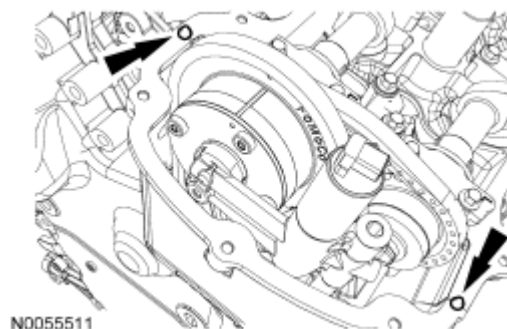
Applying Bead Of Motorcraft High Performance Engine RTV Silicone To Engine Front Cover-To-LH Cylinder Head Joints
